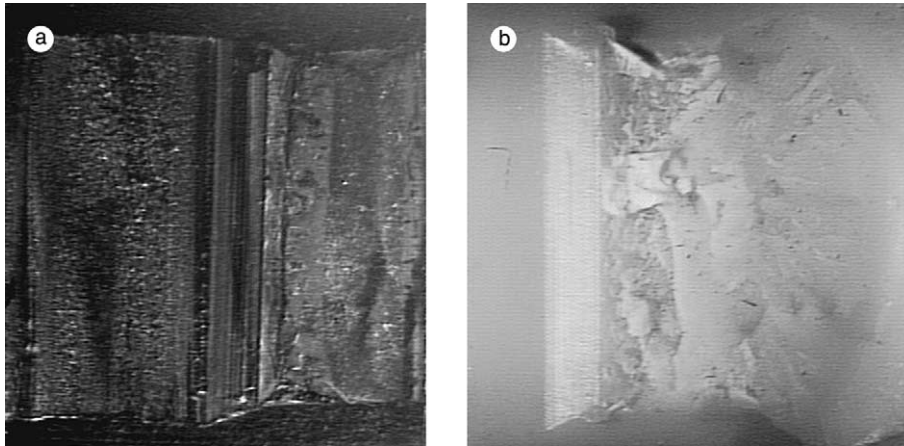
Photograph of fracture surfaces of samples immersed in liquid nitrogen prior to complete fracture: (a) PE1 polyethylene, (b) PE2 polyethylene (The crack extended from the left to the right.).
